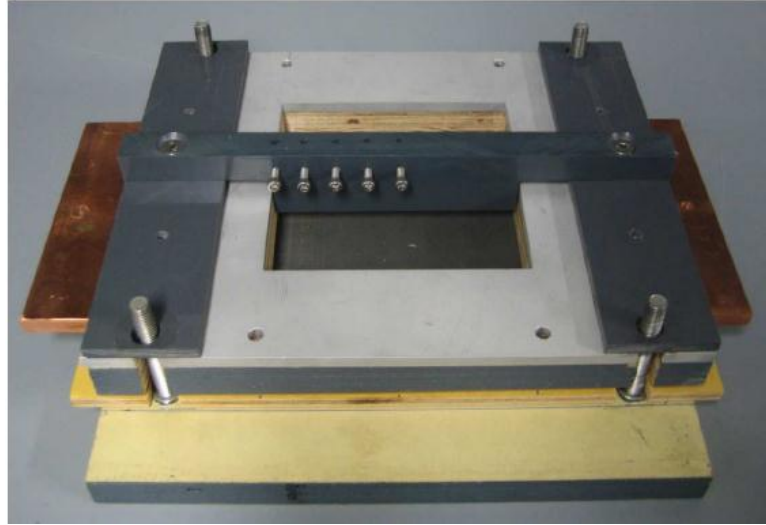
Complete Fixture with Thermocouple Holder Attached (Zantout, 2009)
